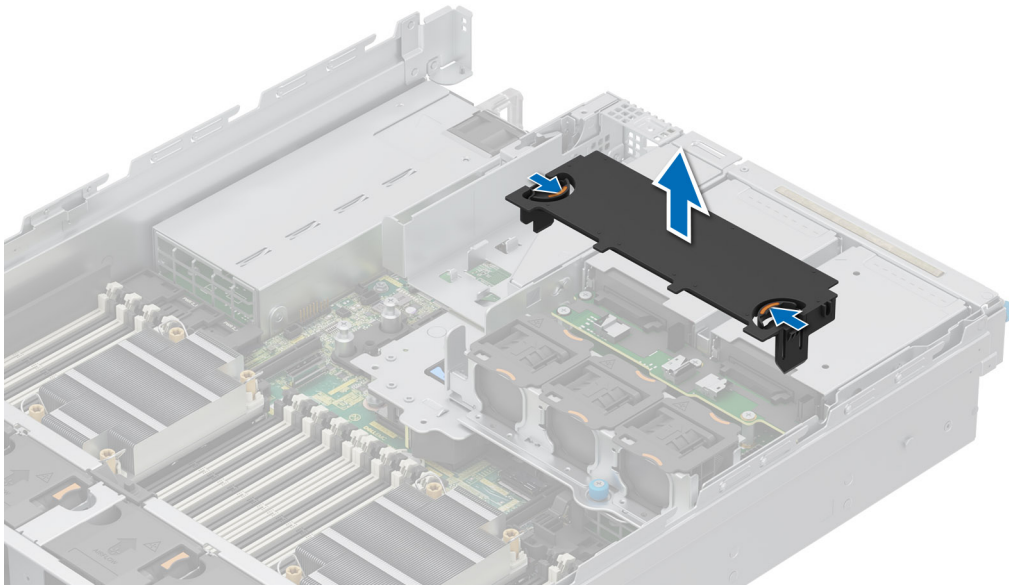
Removing the 4 x 2.5-inch rear drive module air shroud
